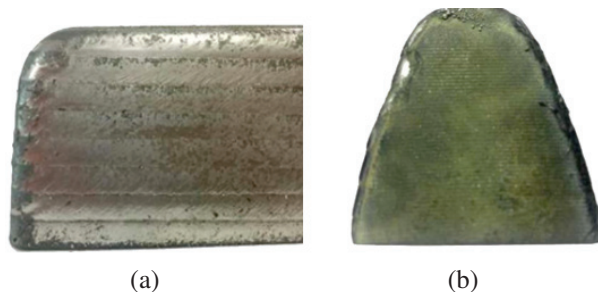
Functional shape of wheel teeth after cladding: (a) Gear working surface; (b) Gear tooth end showing the start and end of laser cladding.
